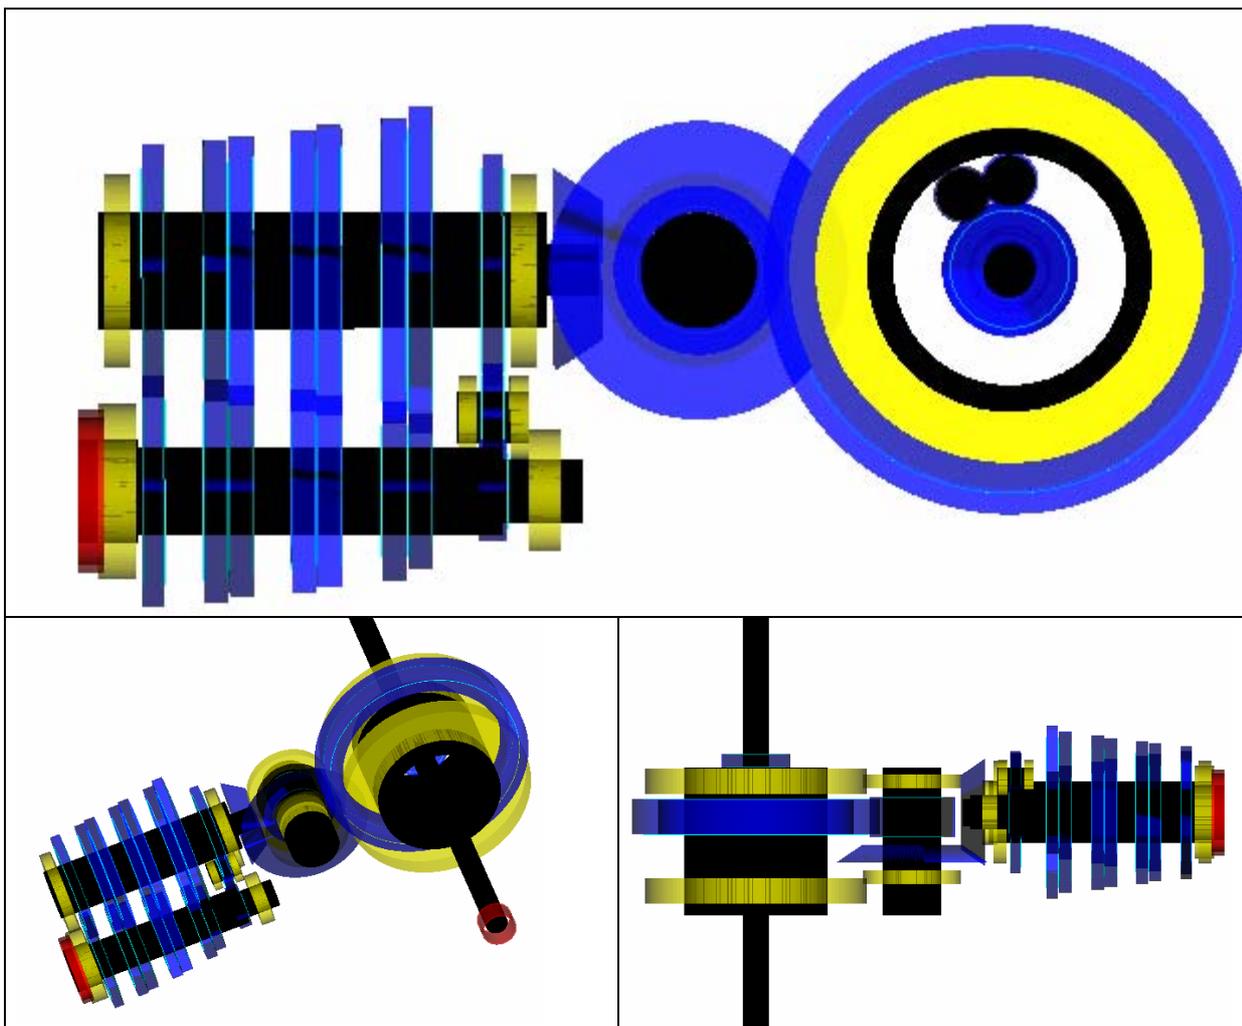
Structure of the gearbox: Black: shafts, blue: gears, yellow: bearings, red: power input or output. Of the differential only one pair of planets is shown.
